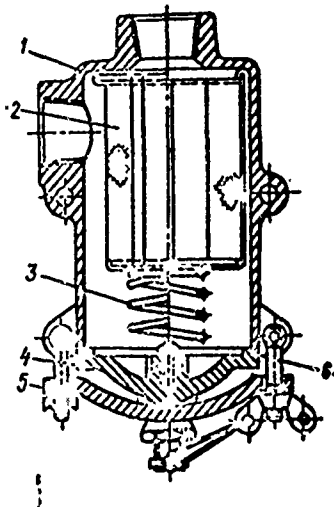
Fuel sump filter: 1 - housing; 2 - filter screen; 3 - spring; 4 - cover; 5 - crosspiece; 6 - eye bolt.
